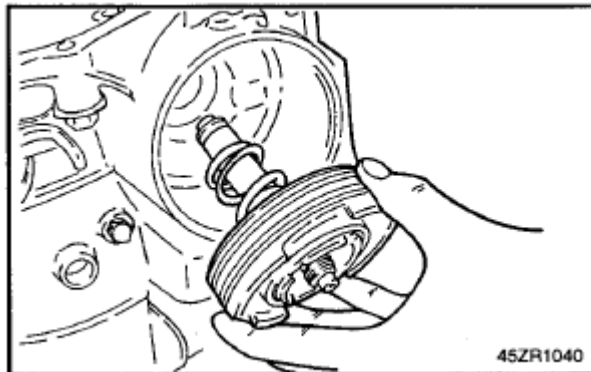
Identifying Kickdown Piston, Servo Spring, & Sleeve
